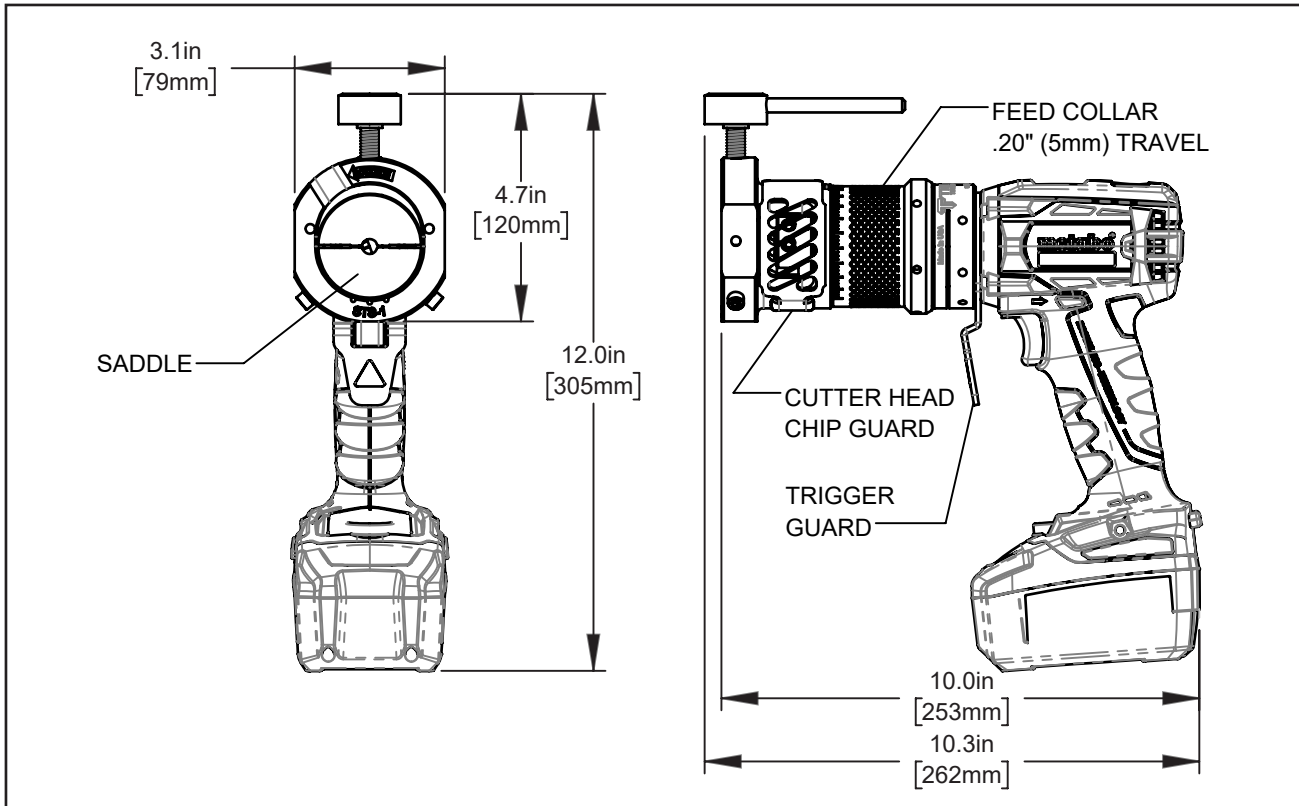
Envelope Drawing STS-1 Cordless Motor (18VDC)
